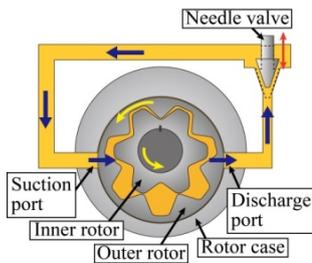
Schematic illustration of the hydraulic pump and fluid path for the brake system.
